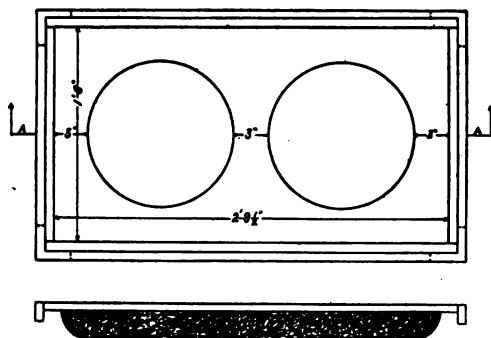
Fireless cooker. Above, top view with cover removed. Below, sectional view of cover.
